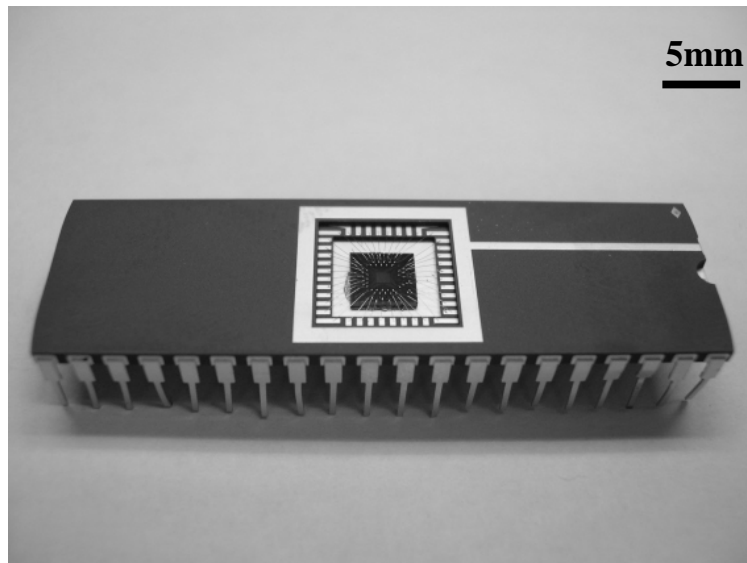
20×20 TFT array chip after dicing, wire bonding, and mounting.
